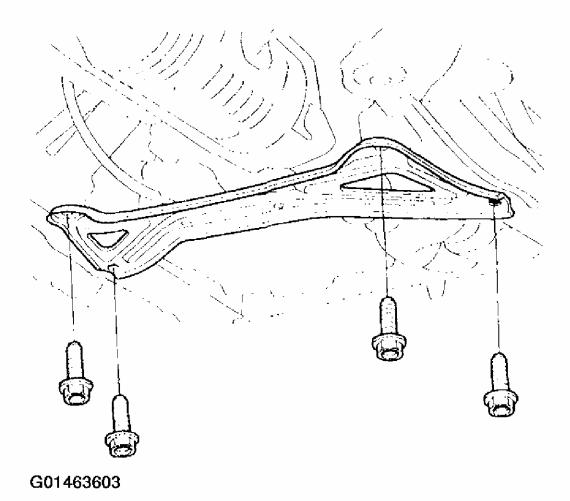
Removing The Front Subframe Stiffener Courtesy of AMERICAN HONDA MOTOR CO., INC.
